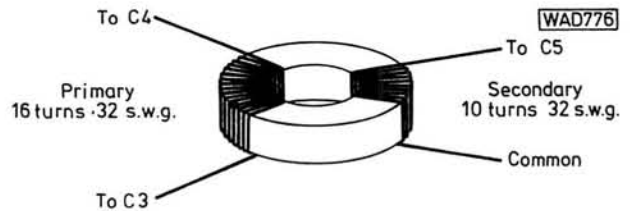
Details of the toroidal coil. The windings should be secured with Denfix
